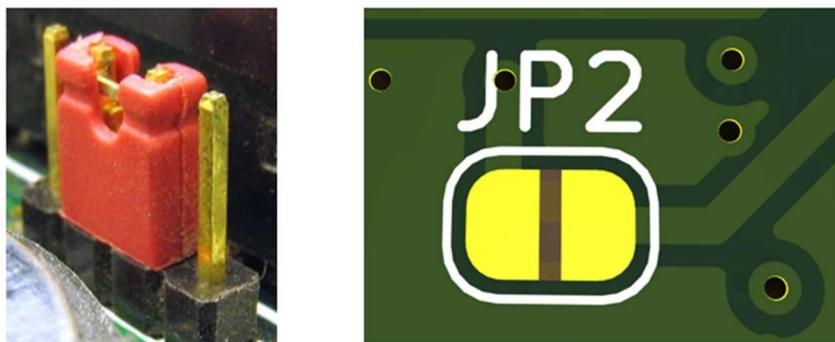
Pin header jumper (left)[33] and unconnected solder bridge jumper (right)
